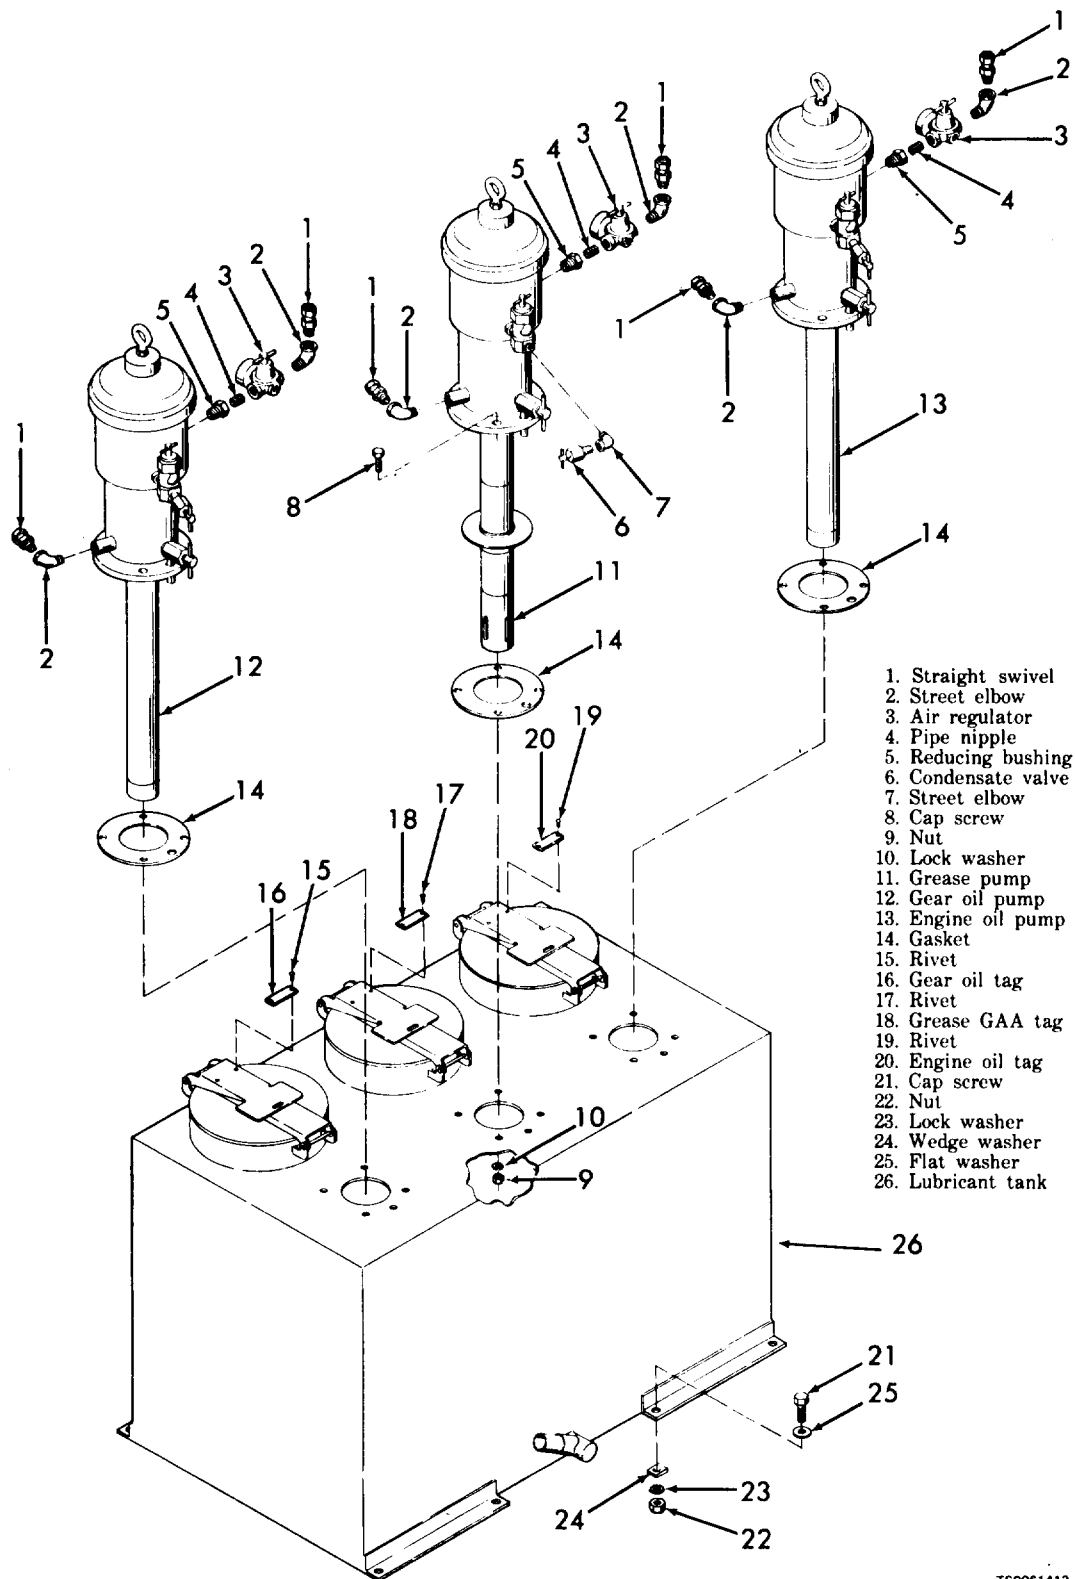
Lubricant pumps and lubricant tank, exploded view.
